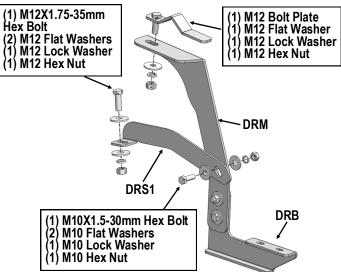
Driver Side Rear Bracket Mounting Location (2011-2016)
